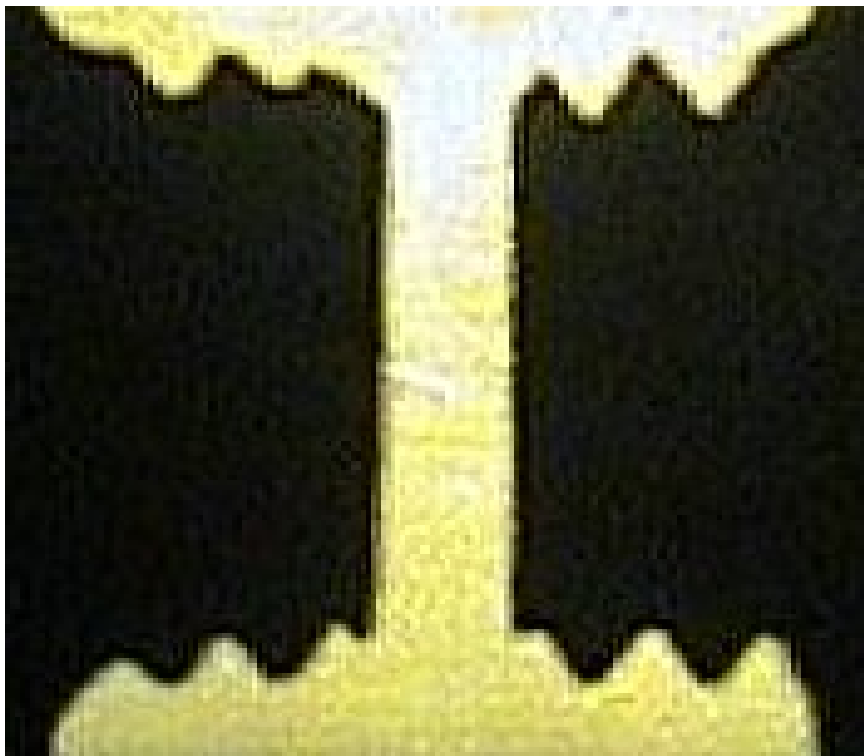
Shadowgraph of worn tool (left) and un-used tool (right)
